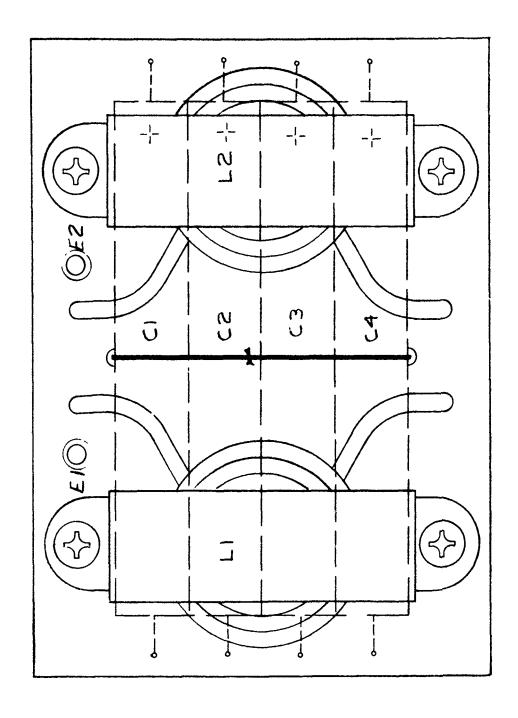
EMI Filter B/C Assembly (A6) Component Locations
